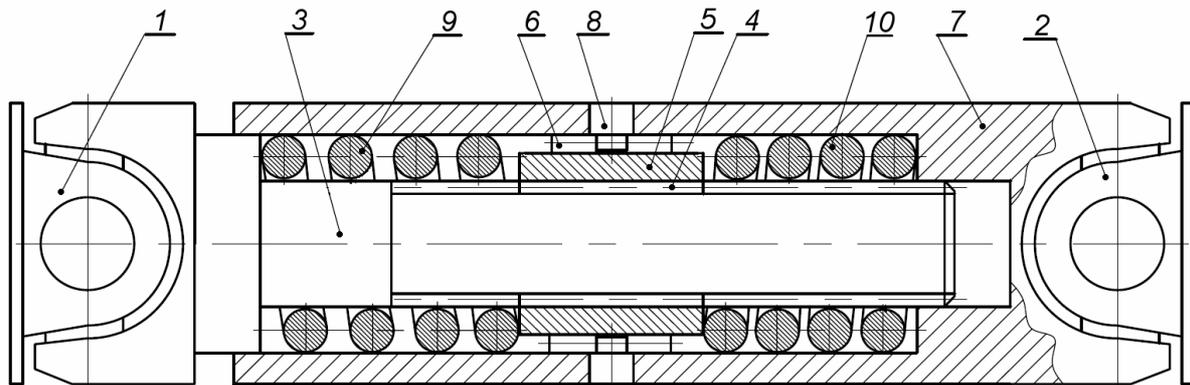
The articulated-overload shaft of the two-way activity, where: 1, 2 – Cardan joints, 3 – shaft, 4 – splined connection, 5 – sleeve, 6 – skew grooves, 7 – casing, 8 – parallel roller, 9, 10 – springs
